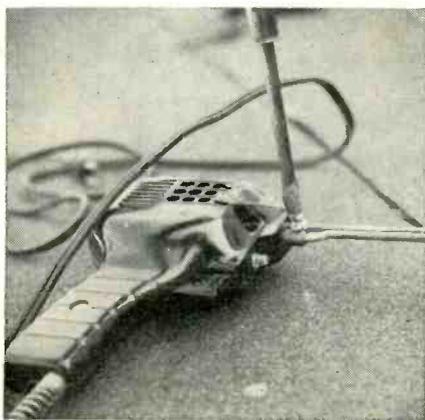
Keeping screws (or lock nuts) tight will solve most slow and poor-heating tip problems on solder guns.
